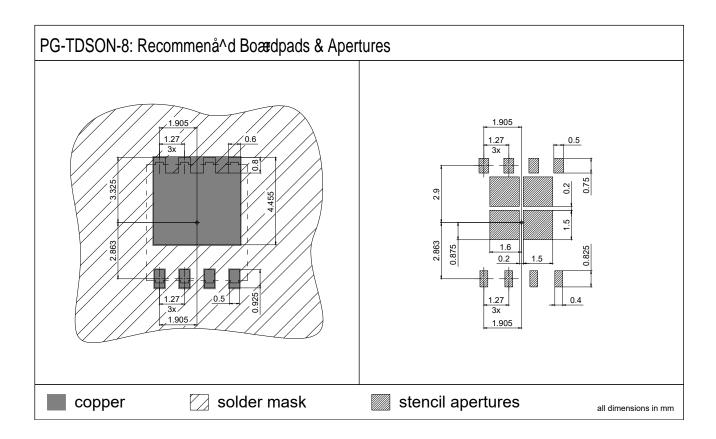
Outline Boardpads (TDSON-8), dimensions in mm
